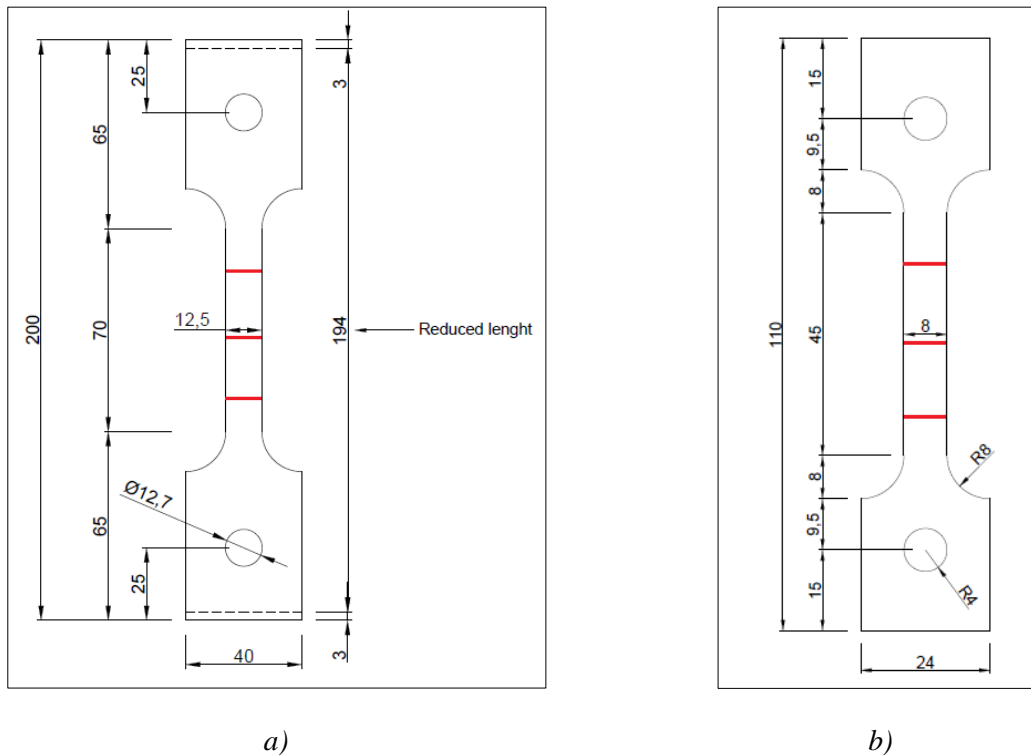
Tensile test specimens. a) UT200 and b) UT110
